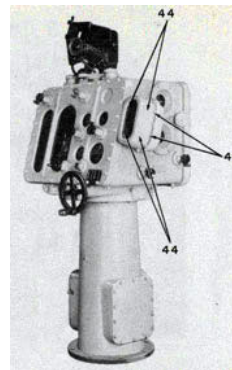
Removal of Internal Lighting Type Bearing Receiver.
